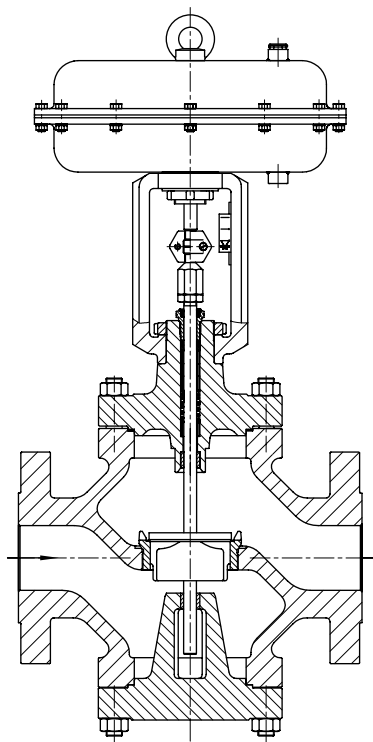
· Type 3254-1 Control Valve with Type 3271 Pneumatic Actuator
